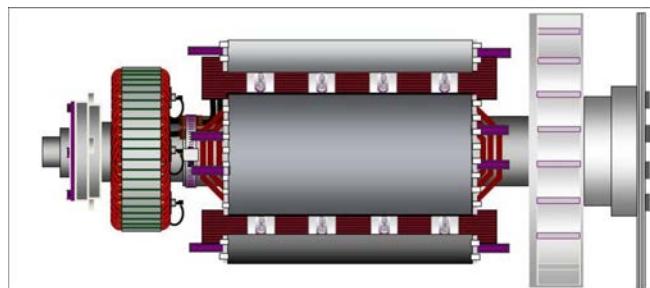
SINGLE BEARING ALTERNATOR ROTOR SHOWING COUPLING DISCS BOLTED TO DRIVE END COUPLING HUB AT RIGHT
